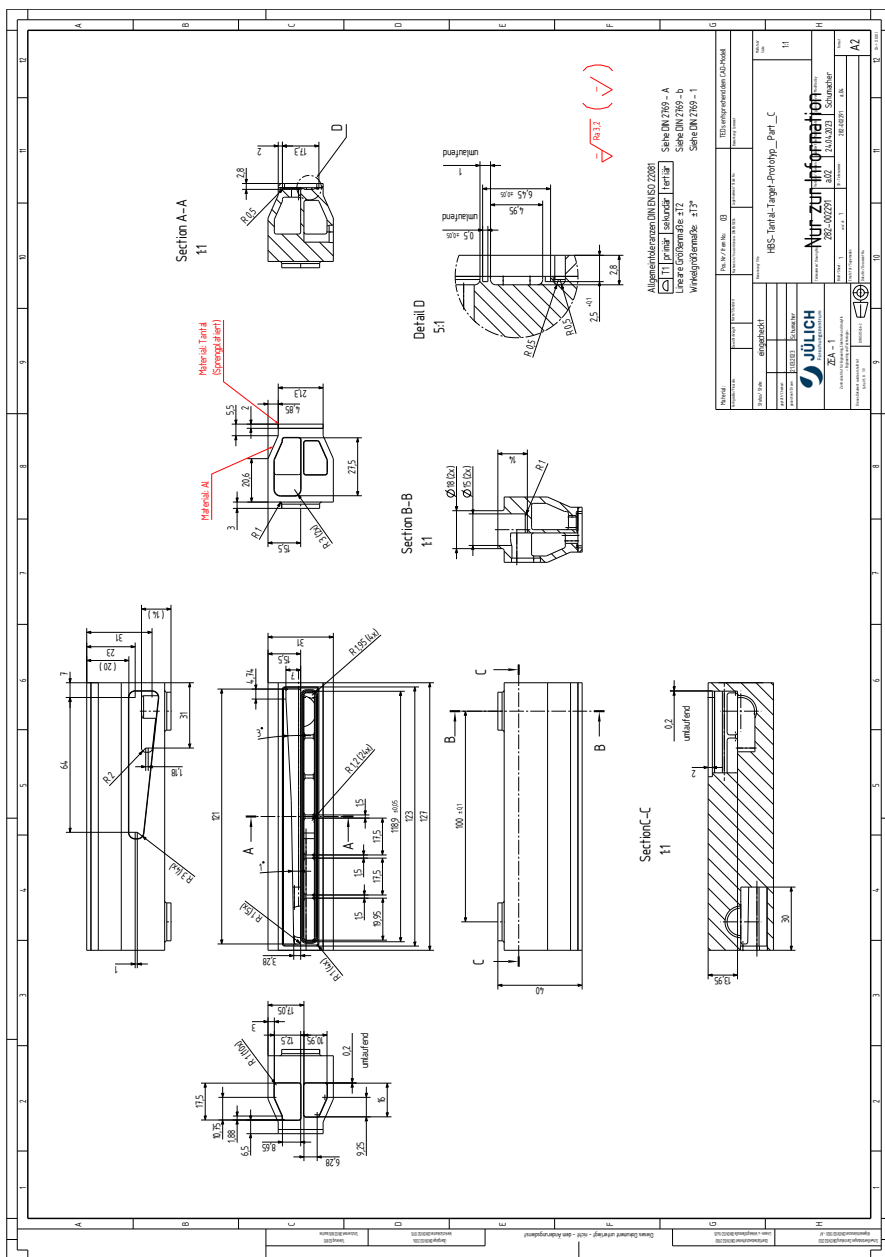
Technical drawings of the adapter for inlet and outlet of the HBS target.
